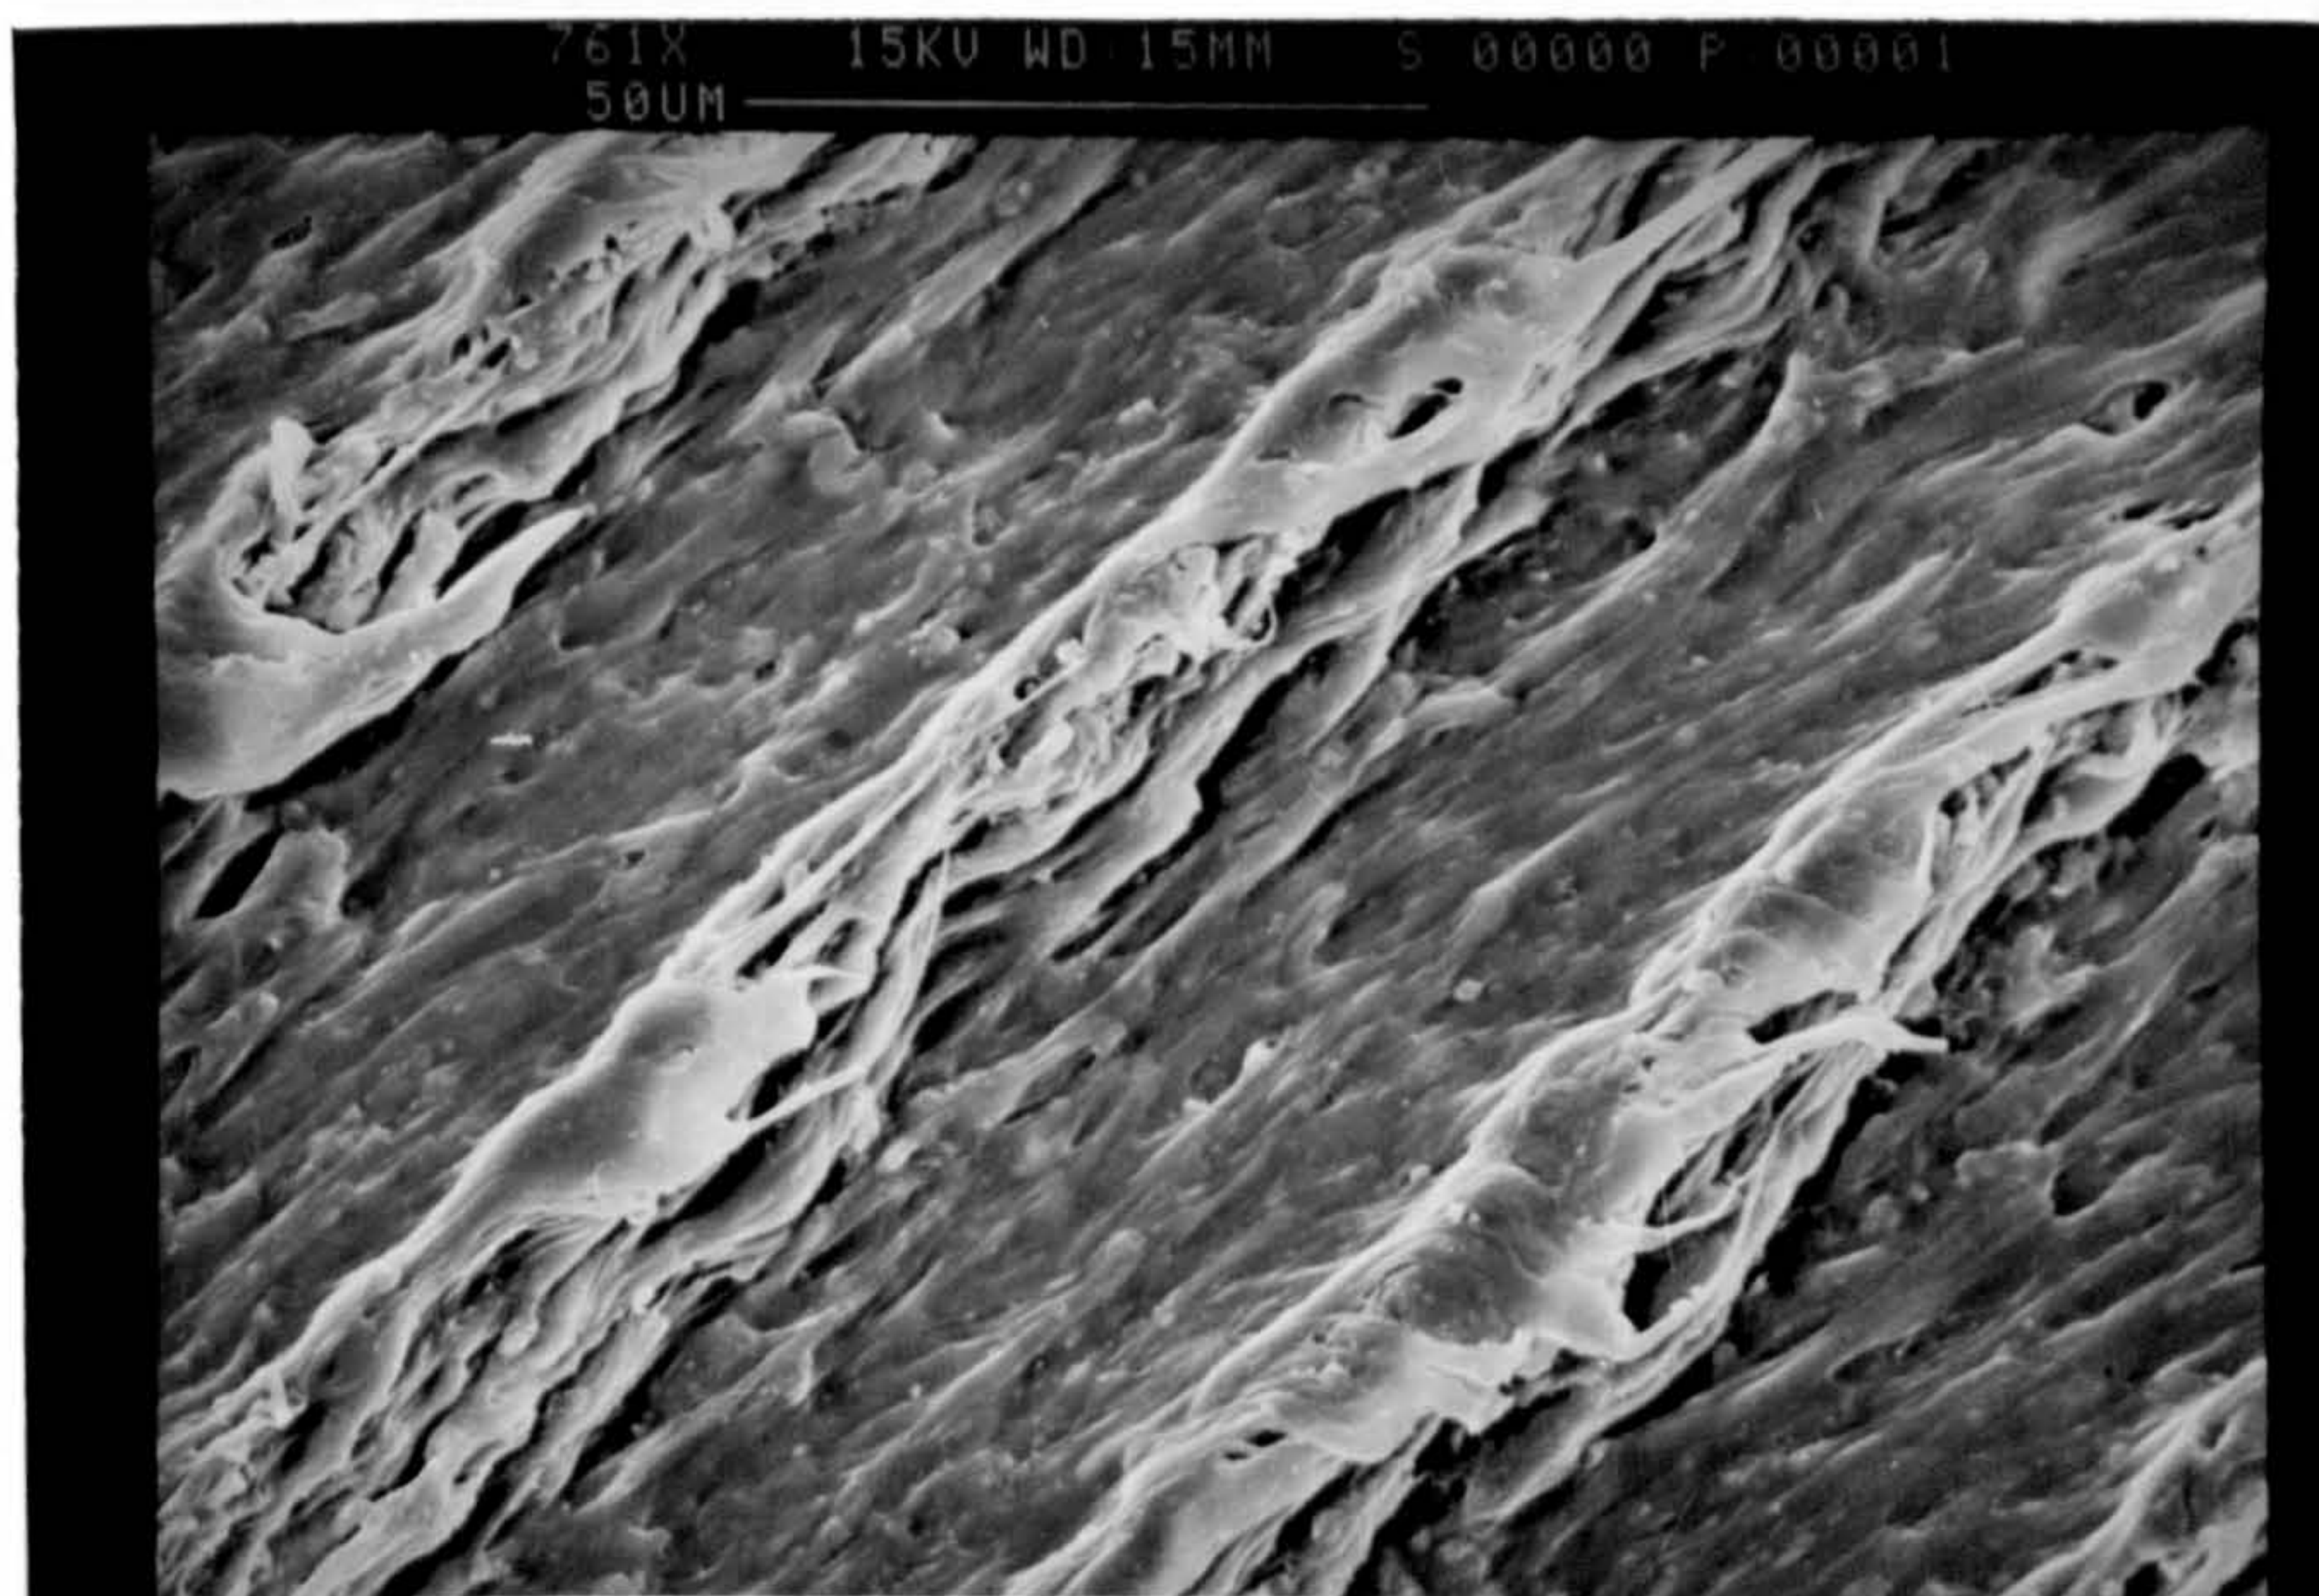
PVC machined surface produced at low cutting speed (25 m/min), showing ductile nature. (Rake angle =  $0^\circ$ , feed = 0.05 mm/rev)
